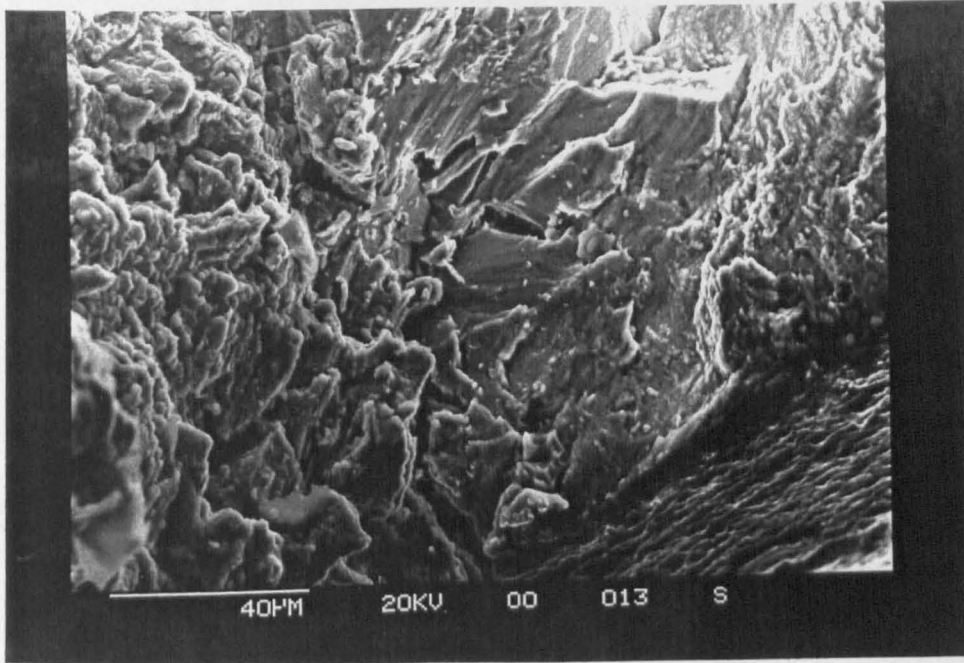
Photograph VI.a.: General view of a hot-salt stress-corrosion fracture surface.
